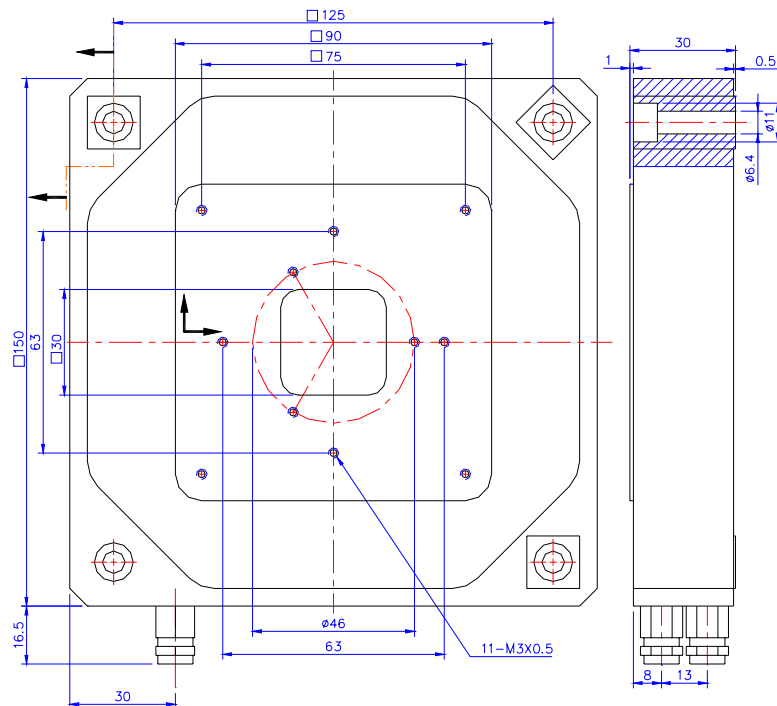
Drawing of PI Flexure stage (unit: mm)
